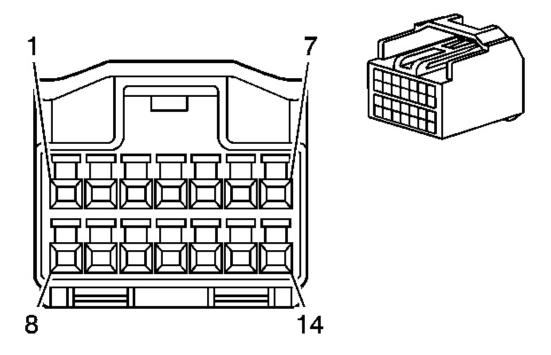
driver Door Lock and Window Switch C2 Connector End View Courtesy of GENERAL MOTORS CORP.
